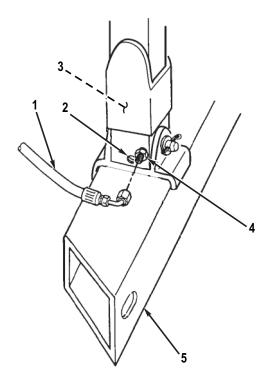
Secure Hydraulic Control Valve-to-Hydraulic Positioning Cylinder Hose Assemblies.
